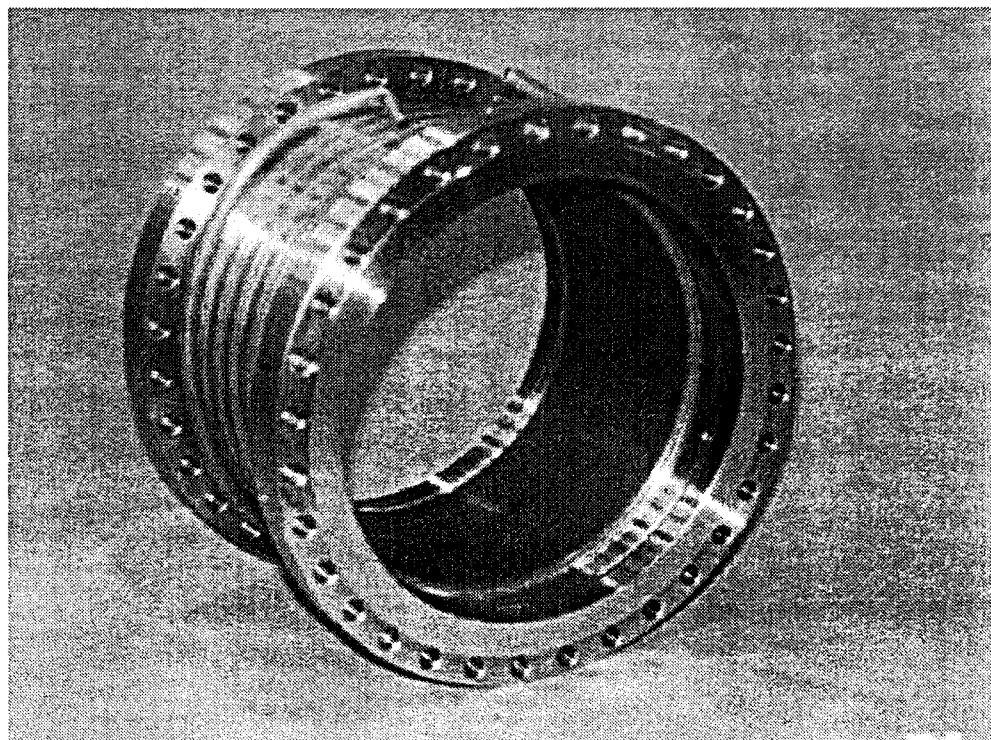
KEK type absorber. Inner diameter is 220/300 mm. A 4-mm thick ferrite layer is made with HIP.
